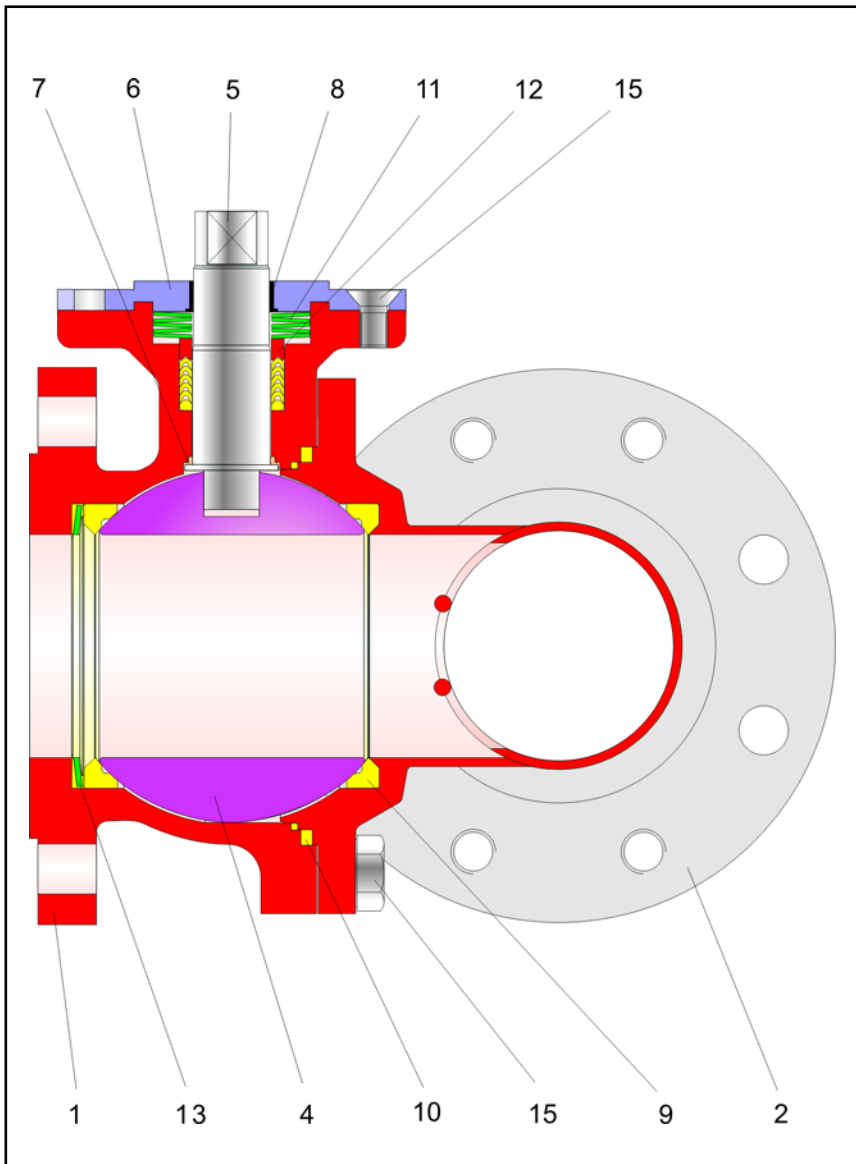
Sectional drawing of metering valve Series 28a/x
